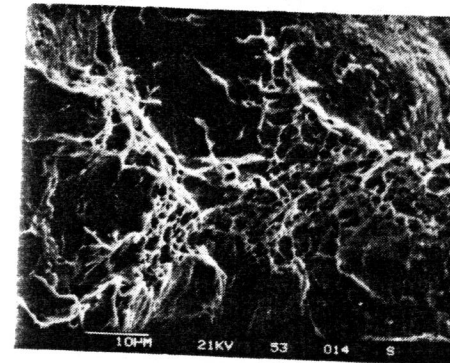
Fracture modes in different zones of composite weld joint sample : Near pre-crack front
